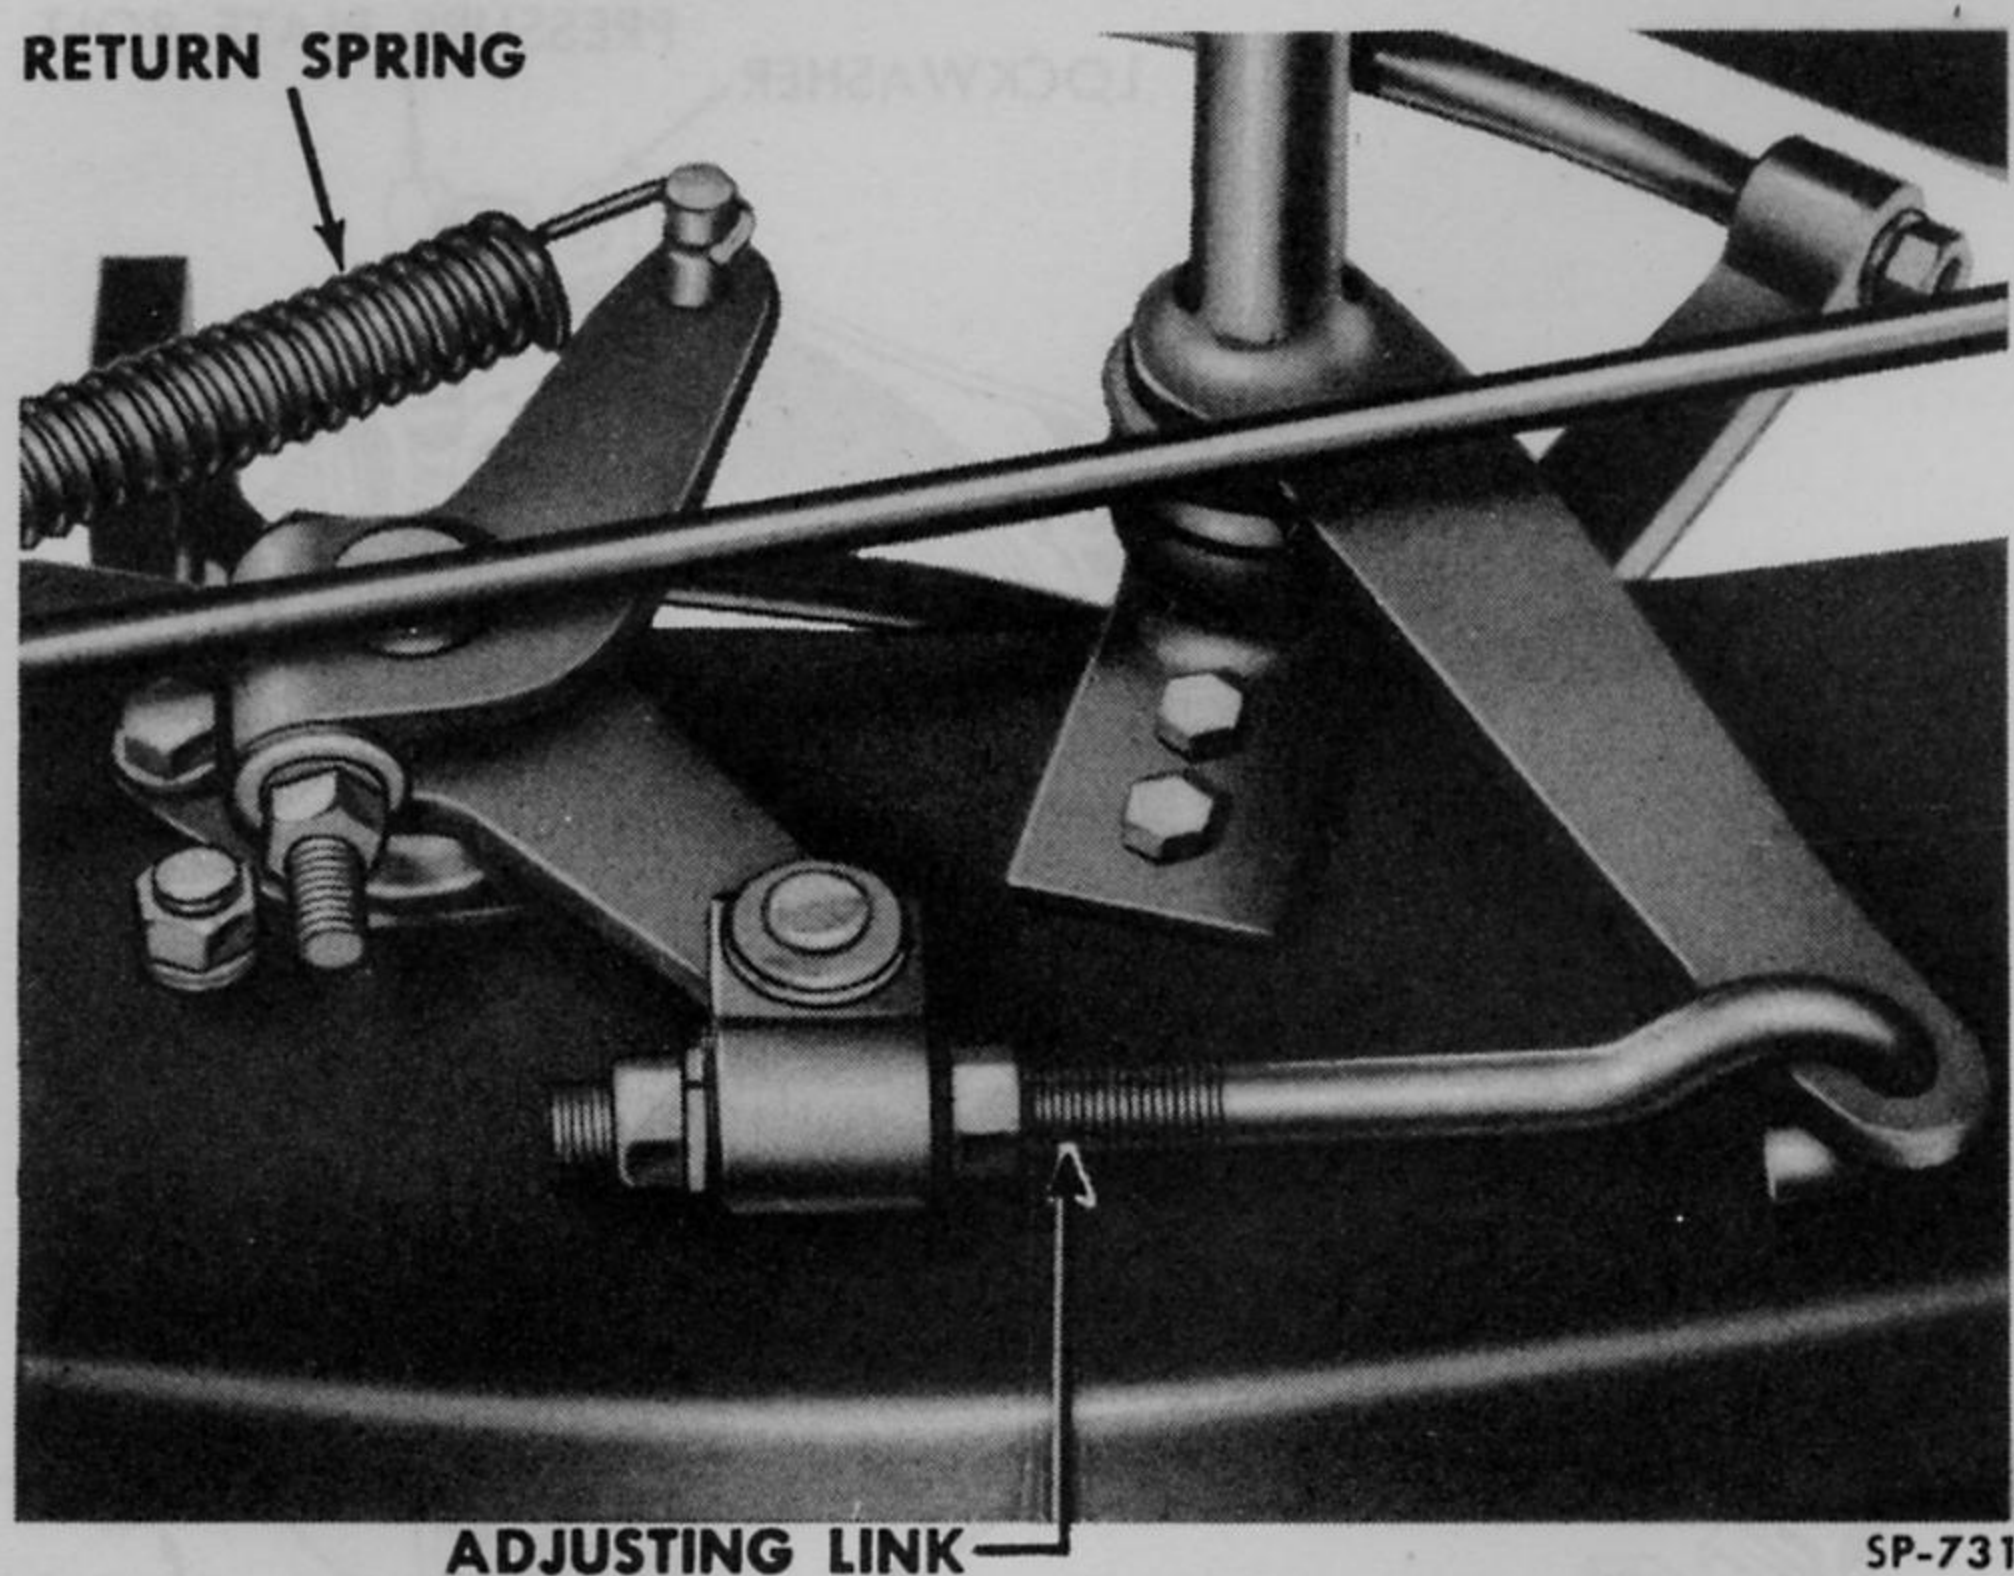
Kaiser Clutch Pedal Linkage Adjustment
